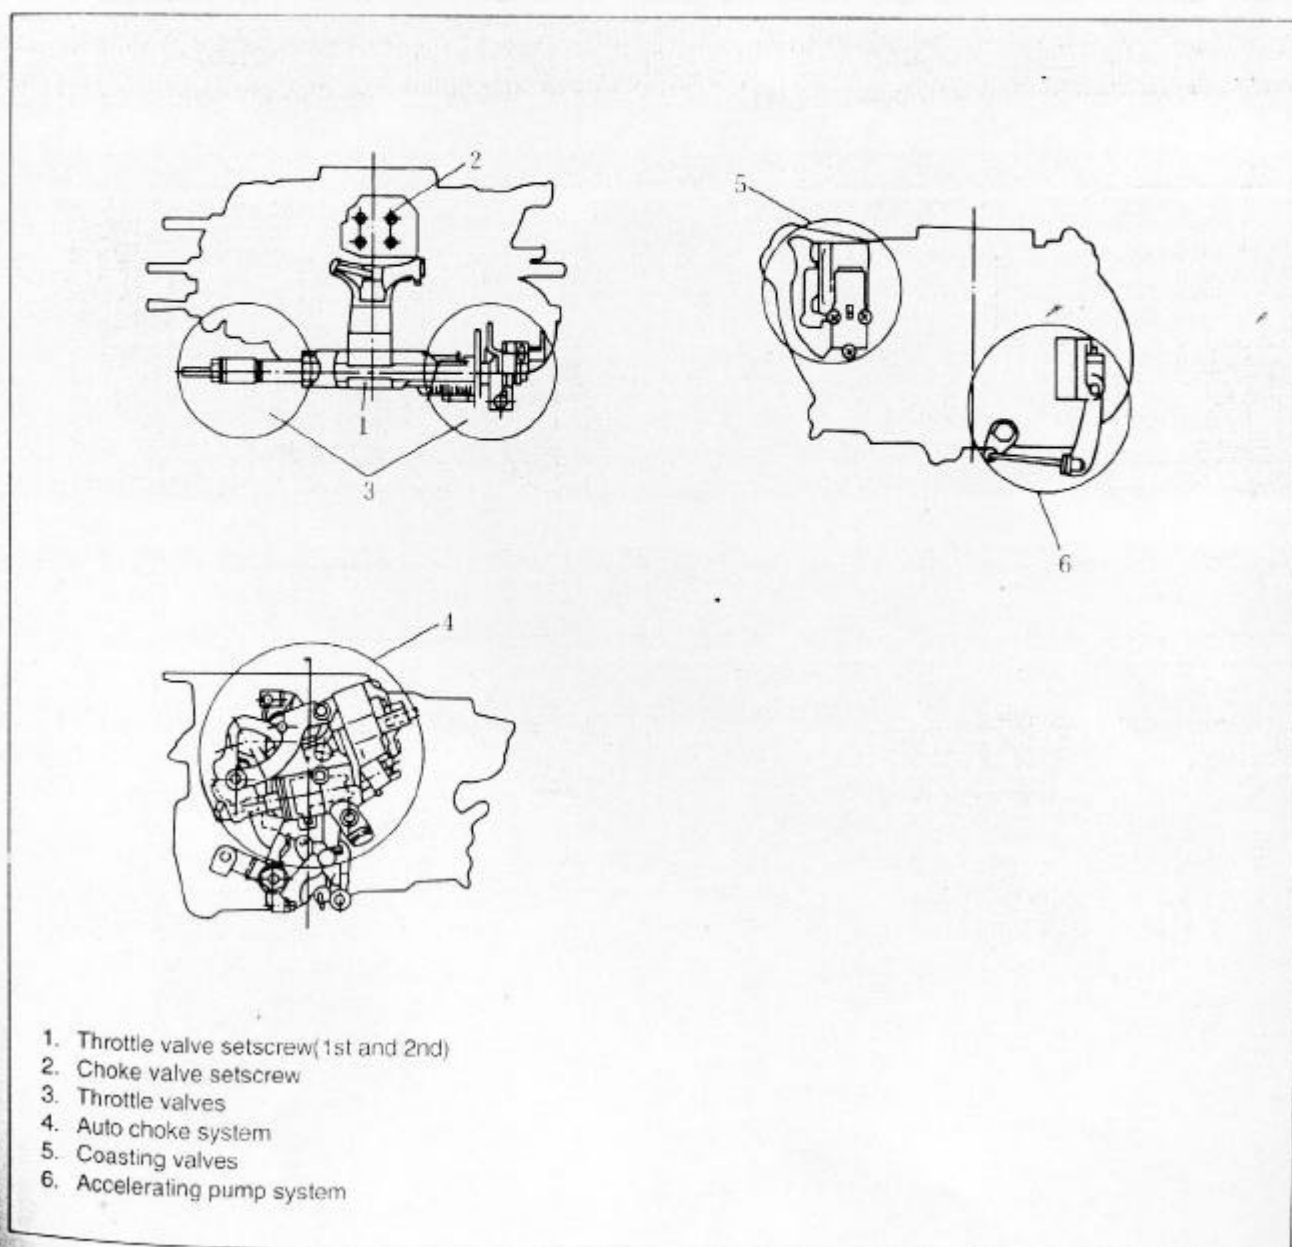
D — 28 NON-DISASSEMBLY PARTS OF CARBURETOR
